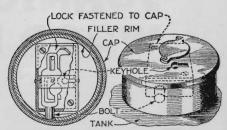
This fuel tank cap lock is an ordinary small door lock riveted or screwed in place under cap.
